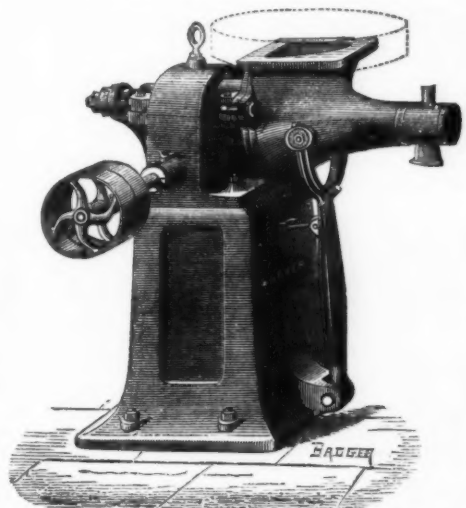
CONTINUOUS SQUEEZING MACHINE.
